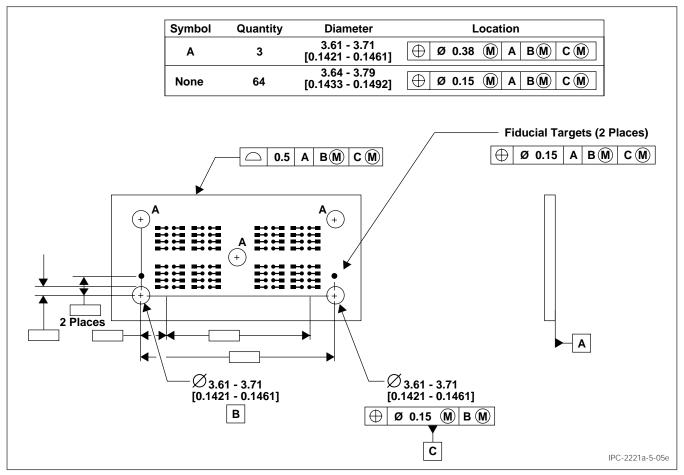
E Example of a Printed Board Drawing Utilizing Geometric Dimensioning and Tolerancing, mm [in]
